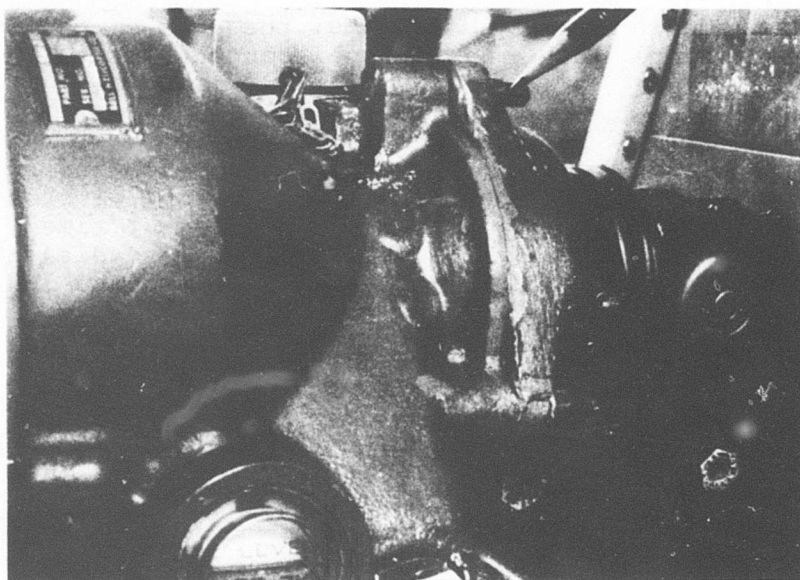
Brushable sealer on output seal housing, OH-58 tail rotor gearbox.
